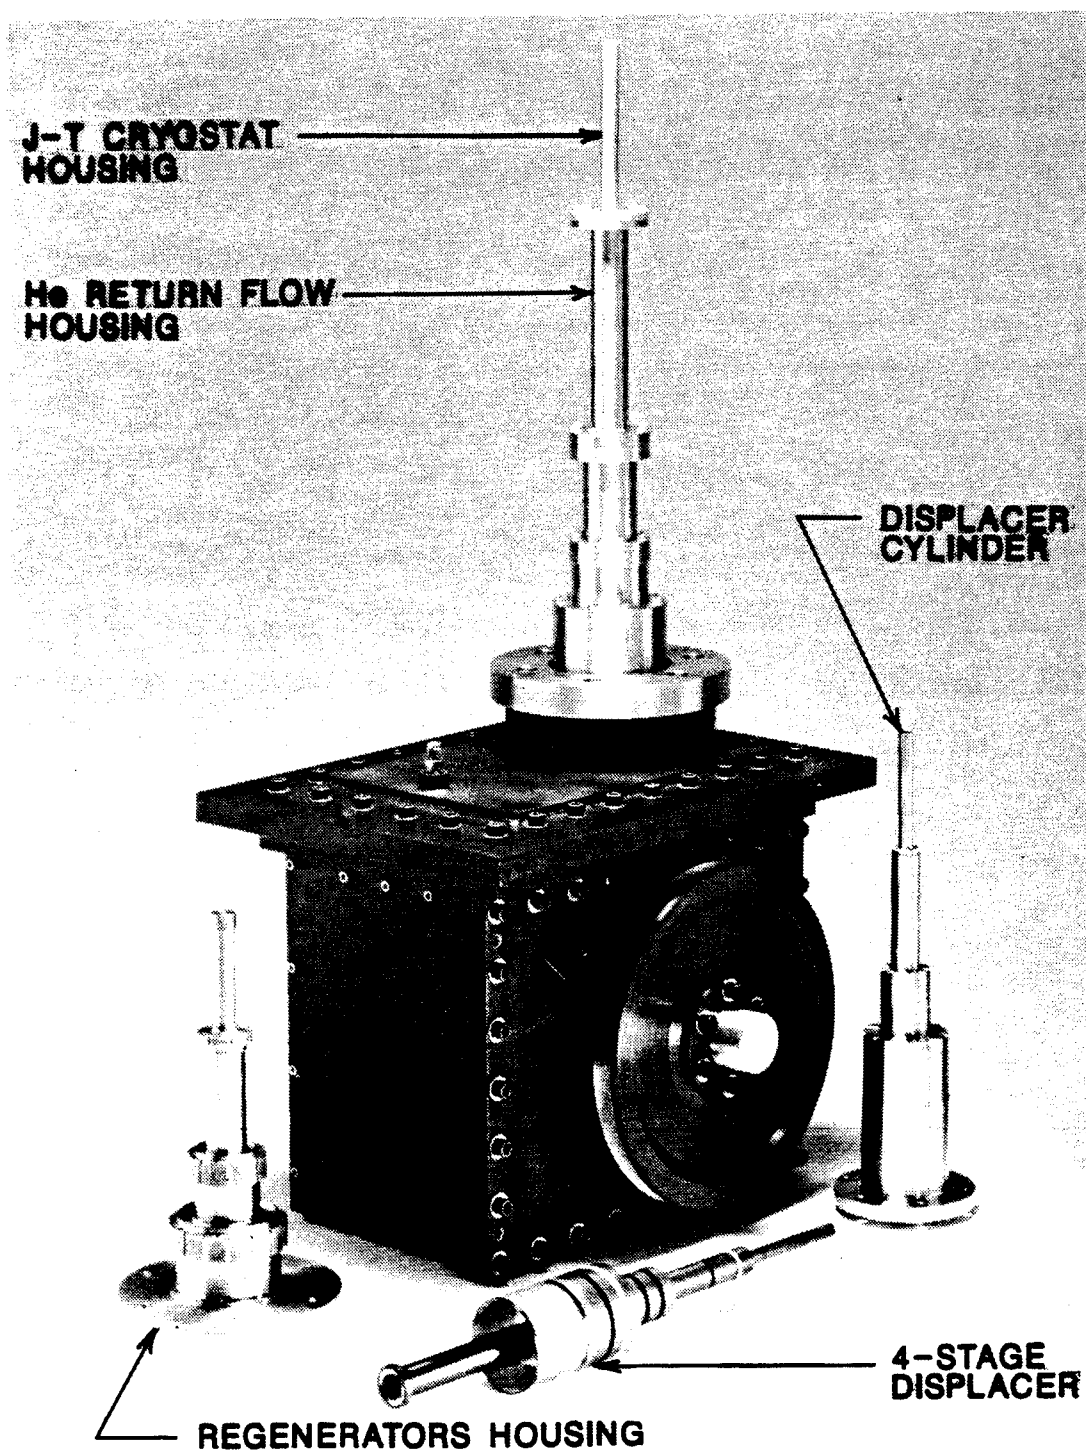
PROTOTYPE ASSEMBLY AND MAJOR COLDHEAD COMPONENTS
